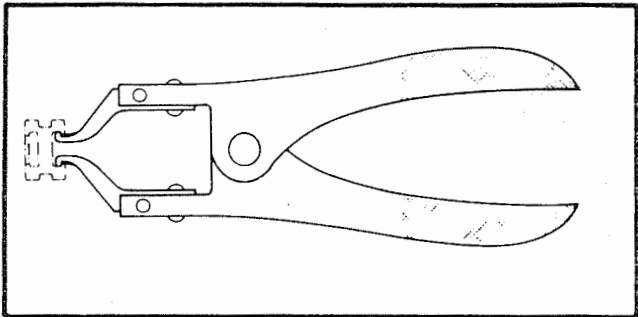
Rocker Arm Shaft Spacer Pliers
